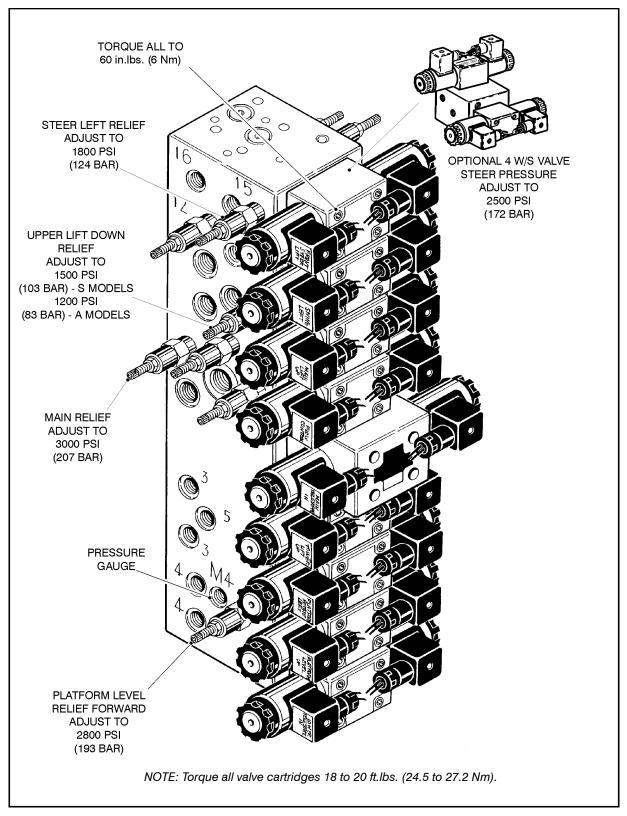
Main Control Valve Pressure Adjustments - Sheet 1 of 2
